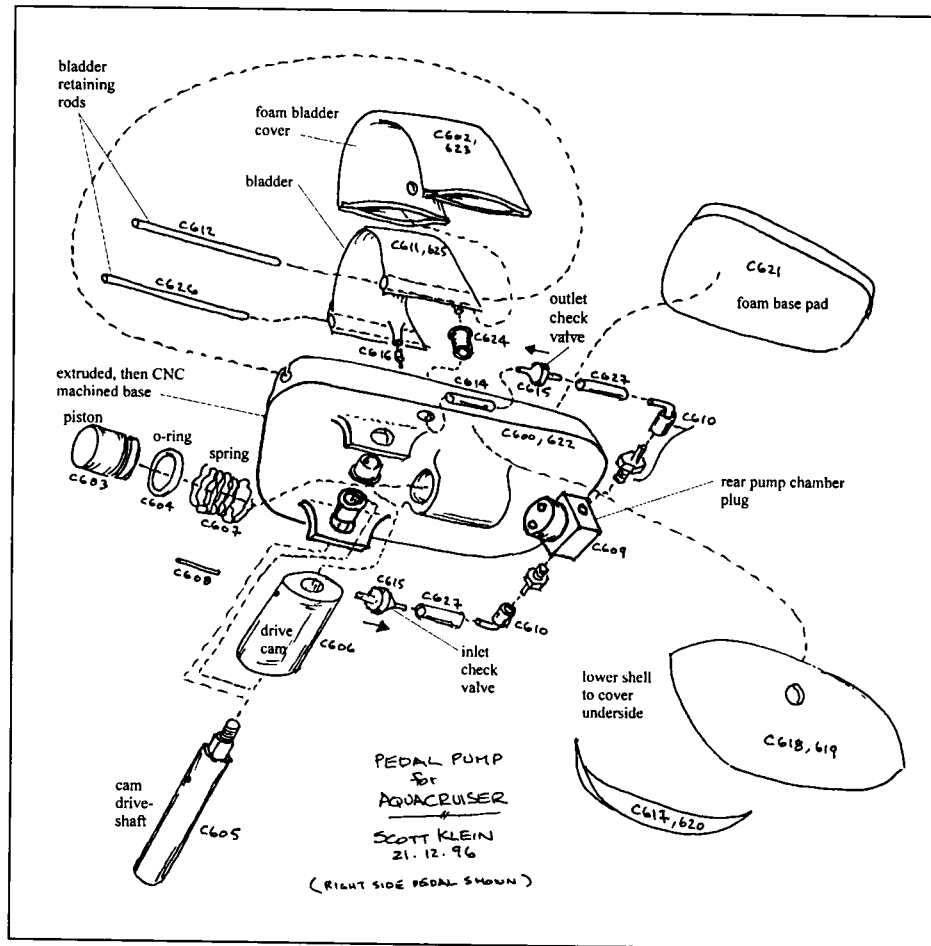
Exploded view of parts and assembly for the final bike pump sandal
